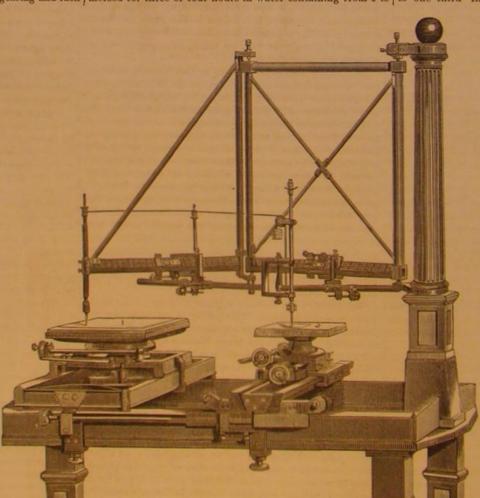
LOTZ' ENGRAVING MACHINE.
